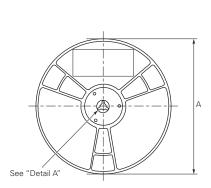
EIA Referenced Taped Component Dimensions for FT600 Devices
